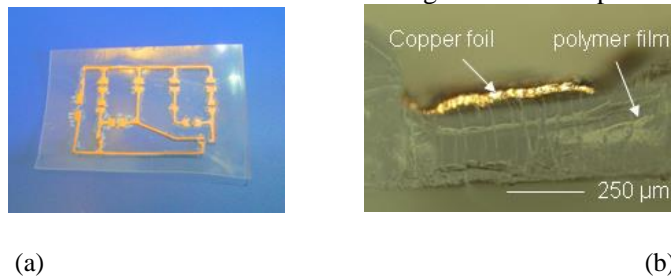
(a) Polymer based flexible electronic board with a single layer of conductor path; (b) View of a cut through the electronic board.
